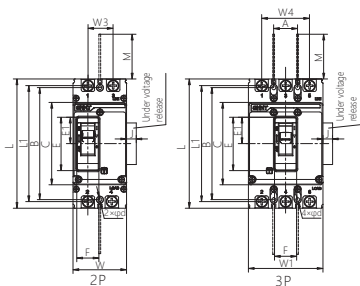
NXM-63~250 front-panel wiring overall and installation dimension
